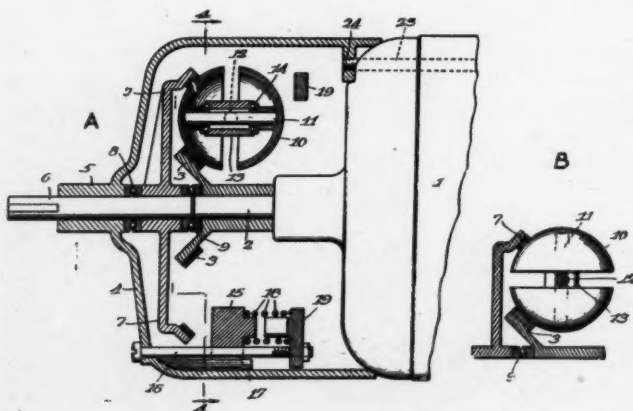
A—Section of the variable speed device showing one of the spherical frictional elements. A sphere adjusted in position to reverse the drive is shown at B
